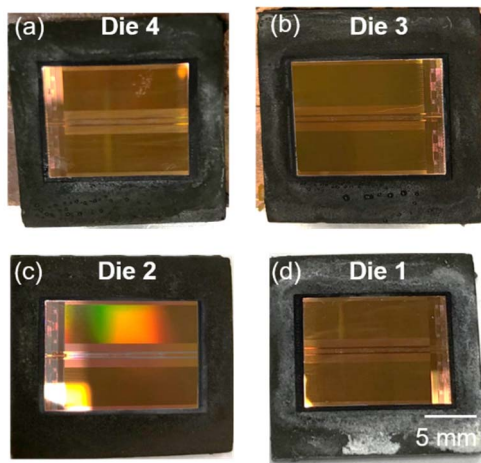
Combination of mechanical and chemical approach to gain access to individual die of four-die stacked package encapsulated in Molding Material B mechanical support (a) Die 4, (b) Die 3, (c) Die 2 and (d) Die 1
